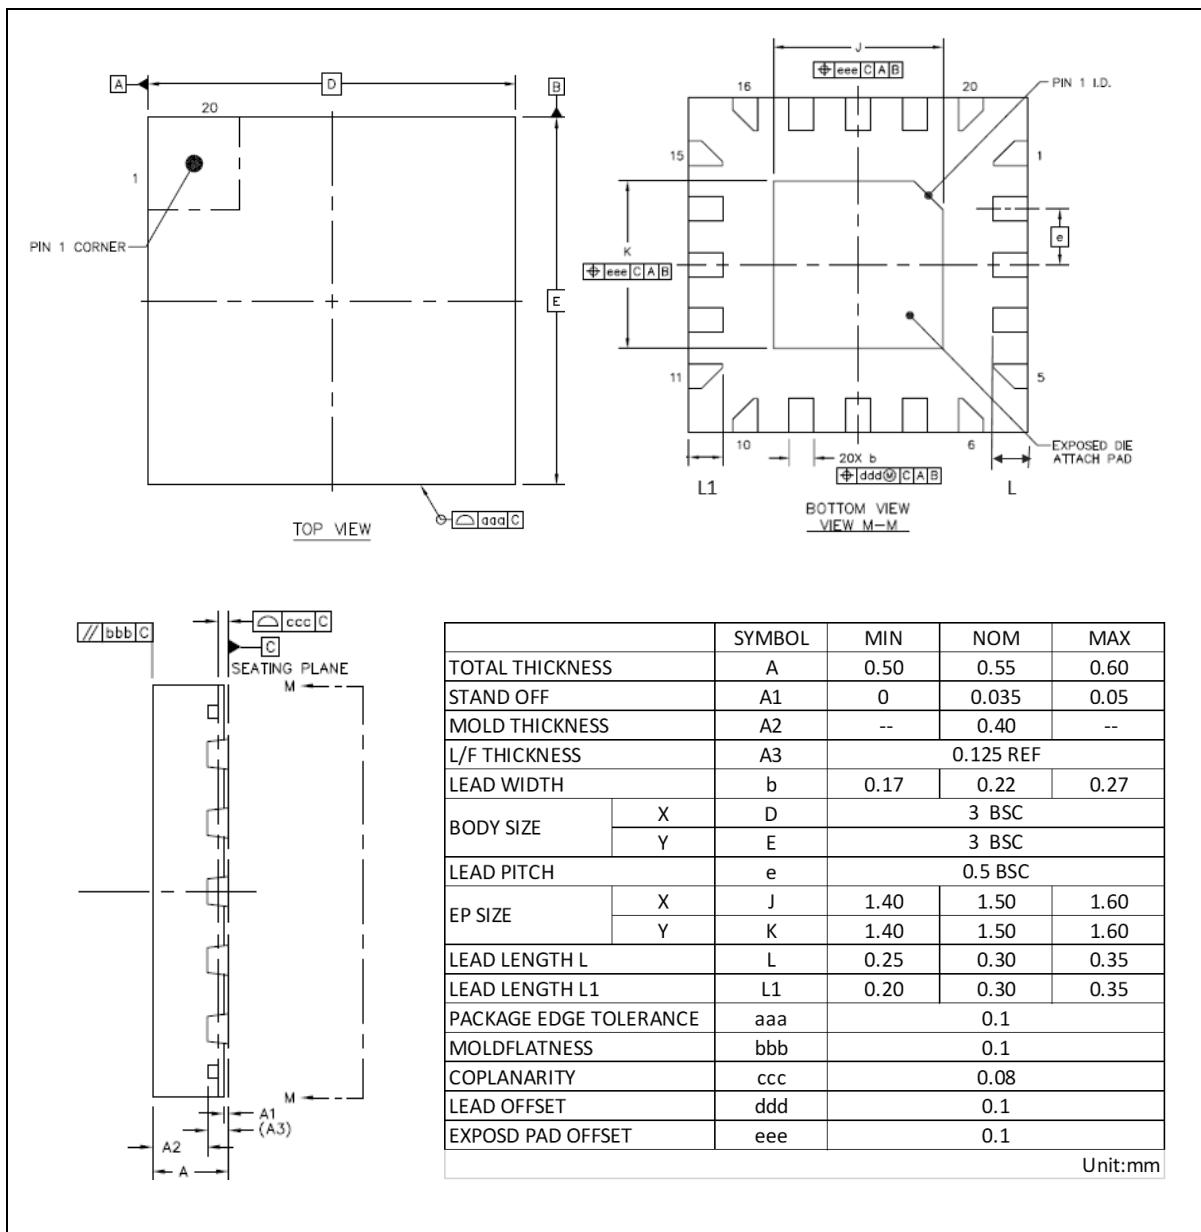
QFN-20 Package Dimension for MS51XC0BE
